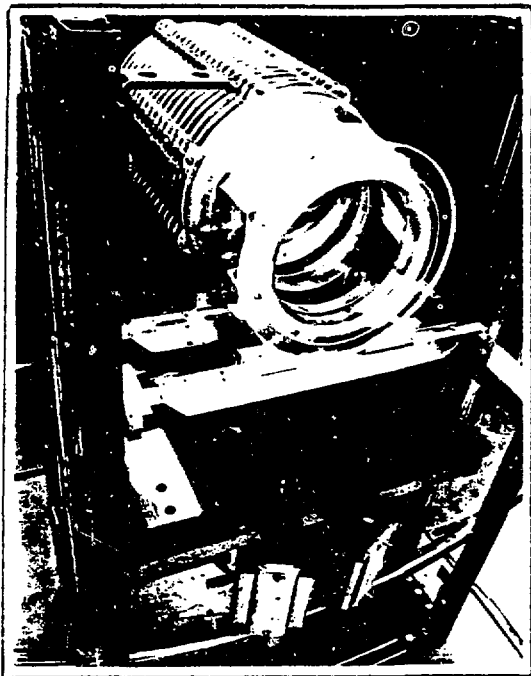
Closeup view of 4" dead section showing pumpout connections for pressure testing.
